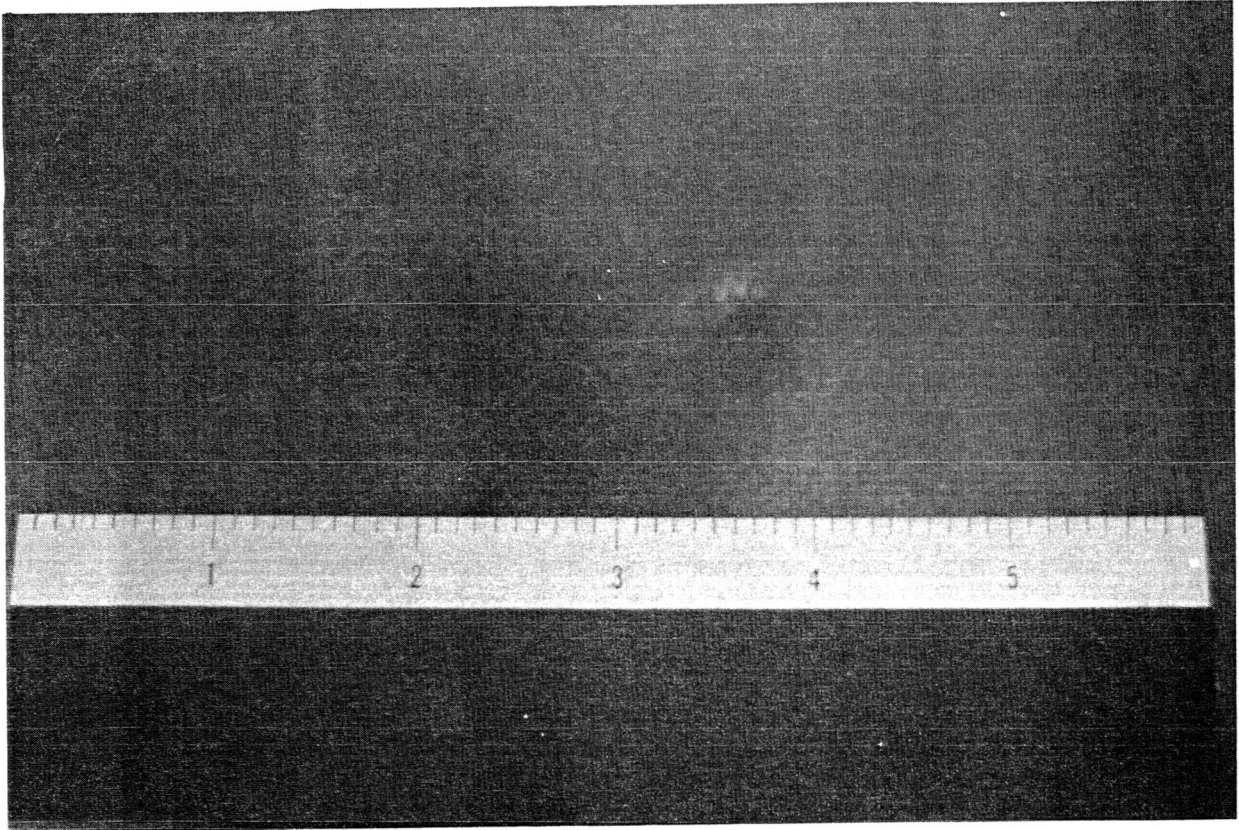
Damage to a Sandwich Panel Face Sheet
